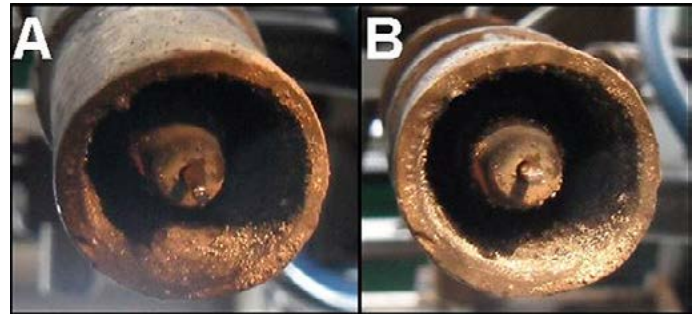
Nozzle and contact tube after MAG overlay welding, without the anti-spatter coating. A- before cleaning, B- after spatter removal.
